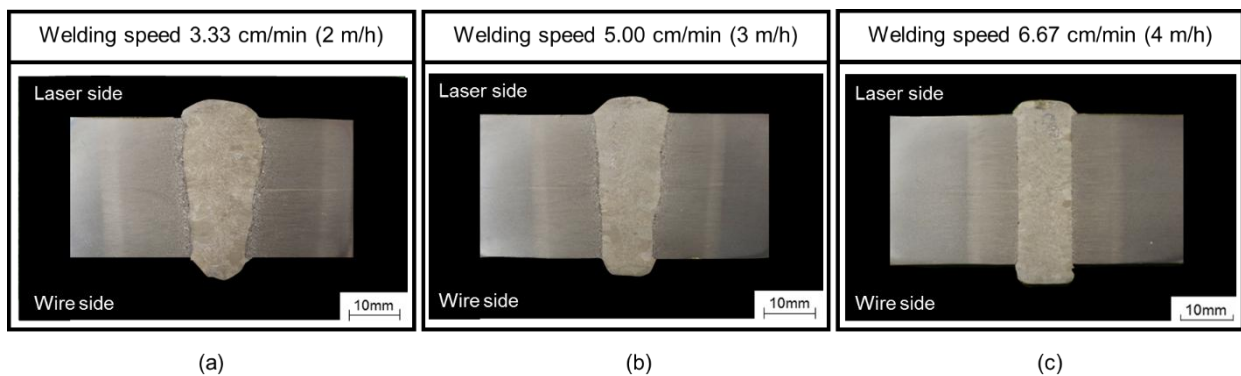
Horizontal cross sections of twin laser method under welding speed affected. Sections cut at weld distance of 50 mm.
